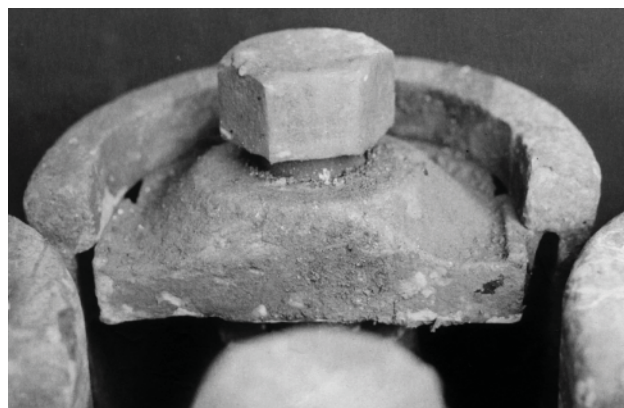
Spreading and Poor Fit of a Horseshoe Holding Section
